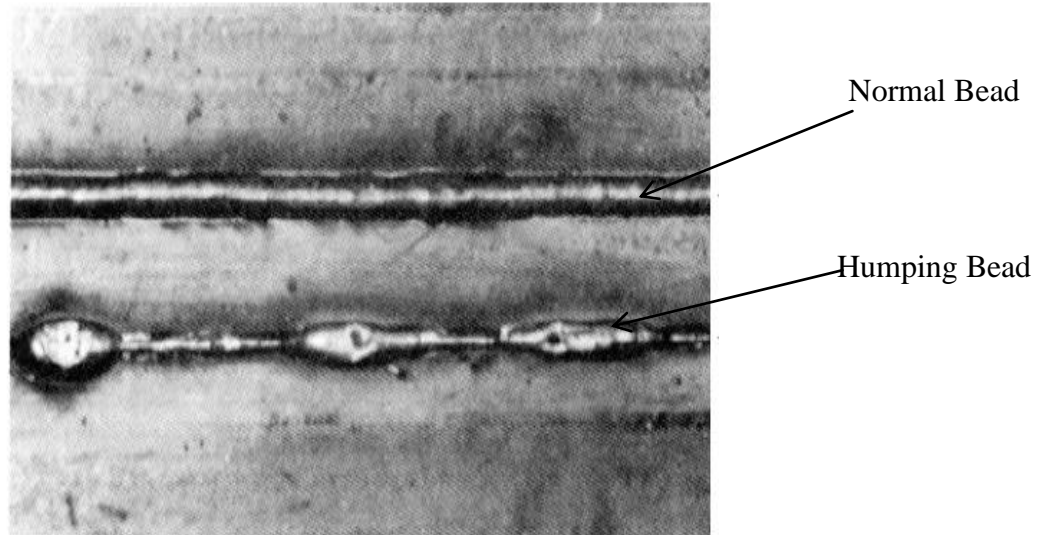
Weld Bead at Low Speed and High Speed [Kobe Steel, 2011]
